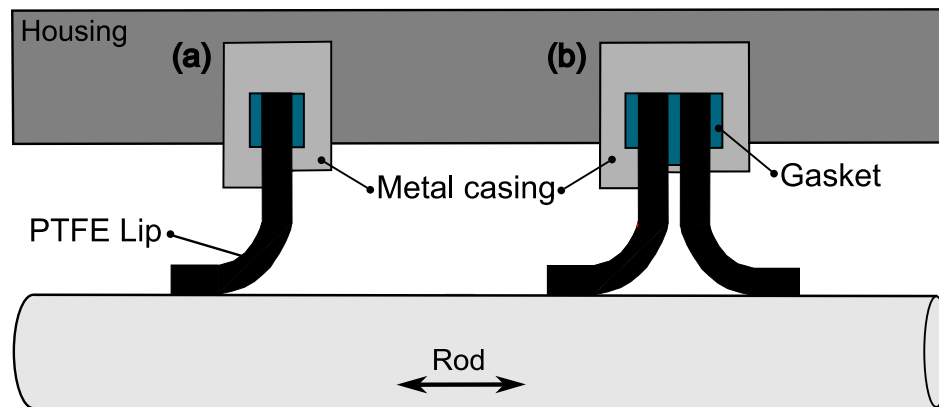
Schematic radial cross-section of: (a) single lip seal and (b) back-to-back double lip seal.
